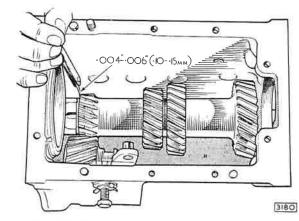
Checking the clearance between the rear thrust washer and the countershaft cluster gear.
